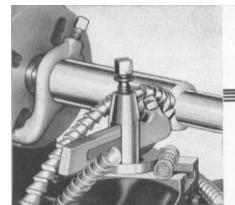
Taking a Heavy Cut on a Piece of Machinery Steel.
